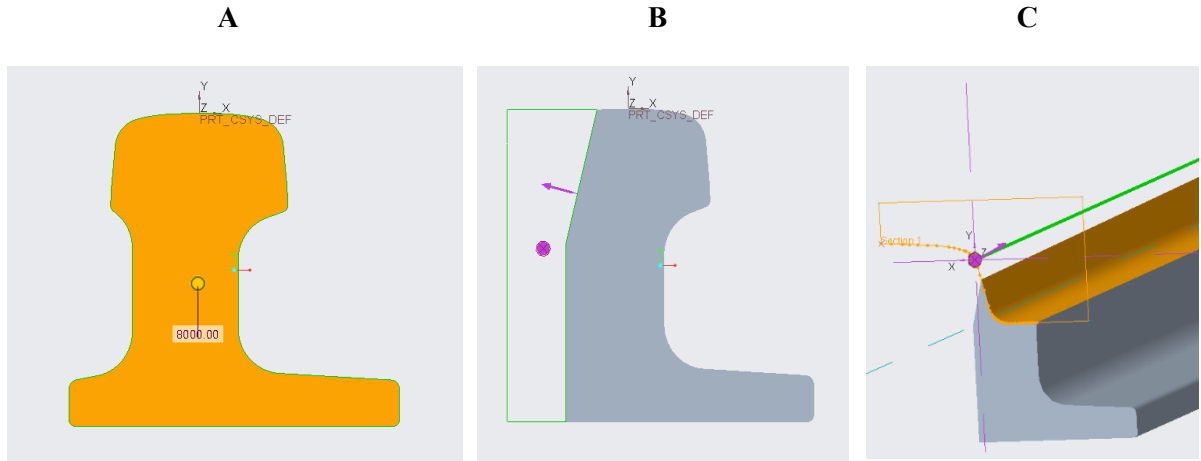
(A) Nominal 60E1A1 switch rail profile; (B) Swept material removal on the field side; (C) Swept material removal on the track-side whilst implementing the milling tool profile
